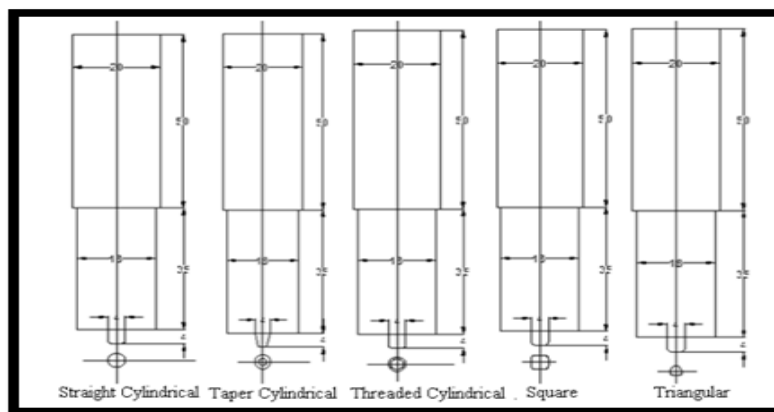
Straight cylindrical, threaded cylindrical, taper cylindrical, square pin geometries [43].
